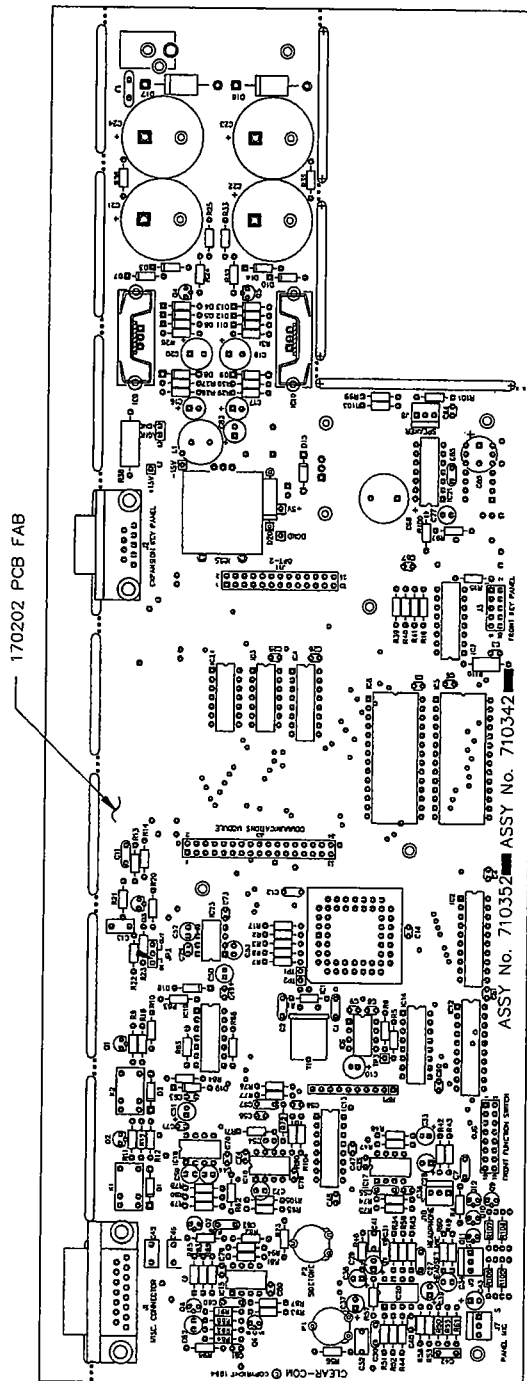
Assembly Drawing—ICS-102/102T Main PCB Rev. E
